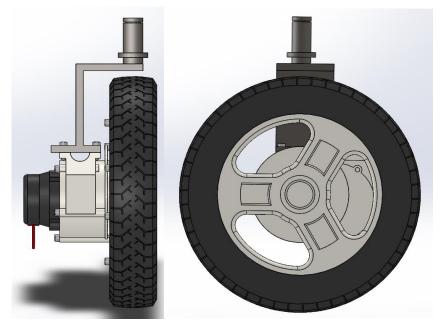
Rear and Side Views of EulSpill Wheel/Motor/Bracket Assembly
